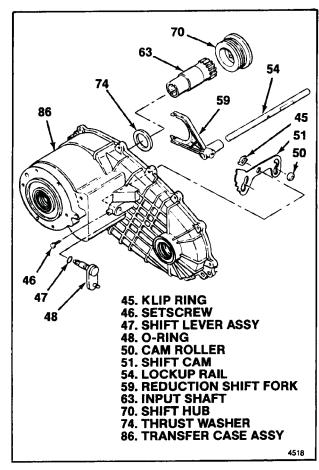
Installation of Reduction Shift, Carrier and Input Shaft Group
